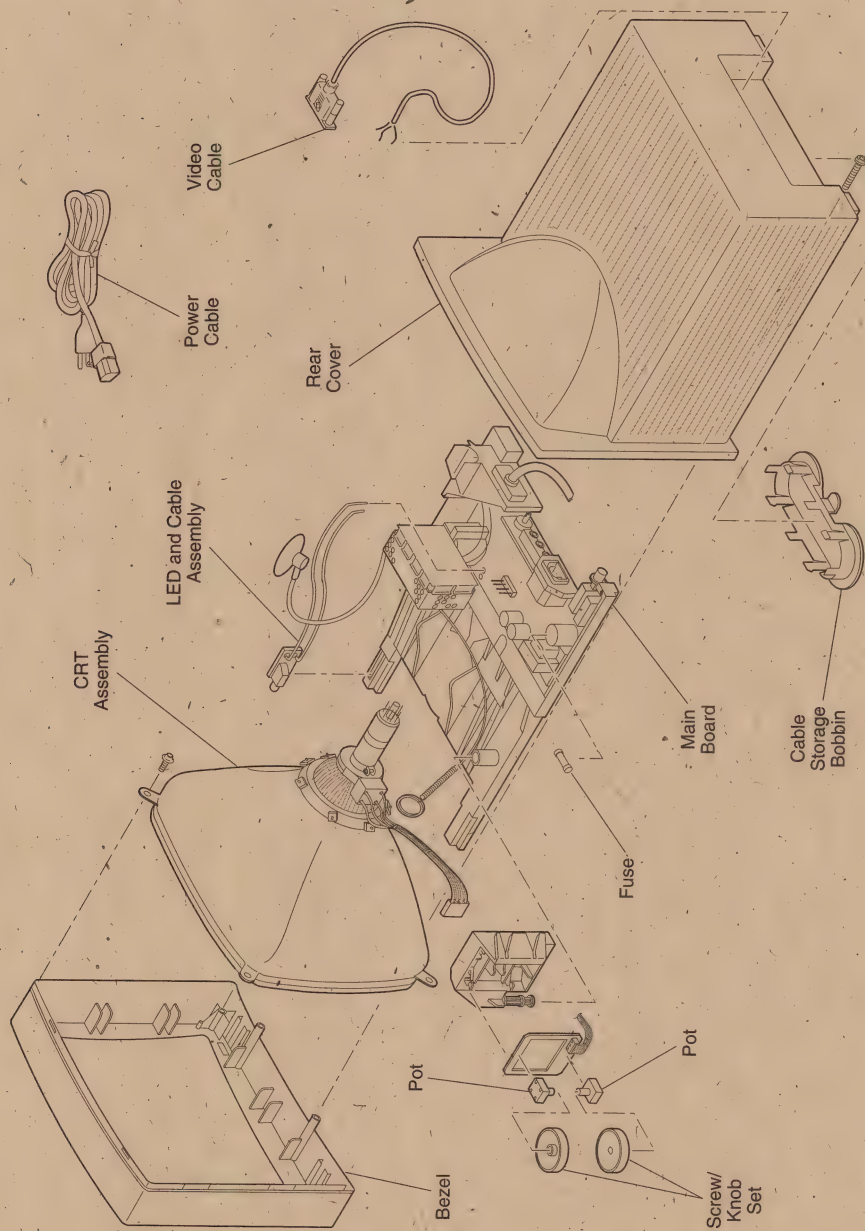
Macintosh 12-Inch Monochrome Display Exploded View
